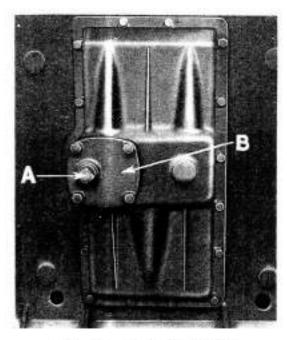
ENGINE SUMP A. Drain Plug B. Cover Plate
